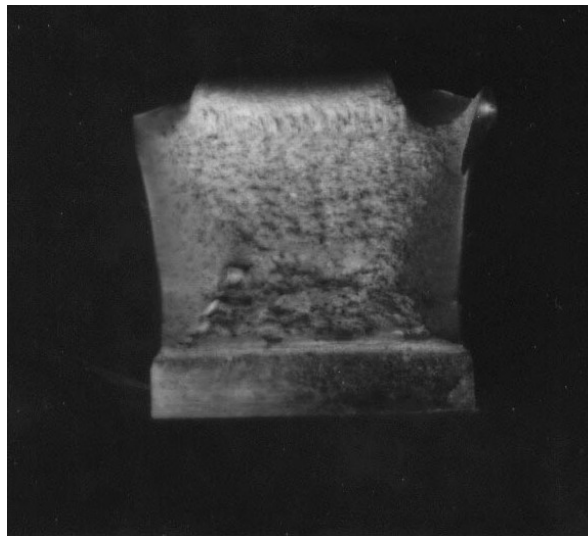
Ductile fracture surface of impact specimen [51]
